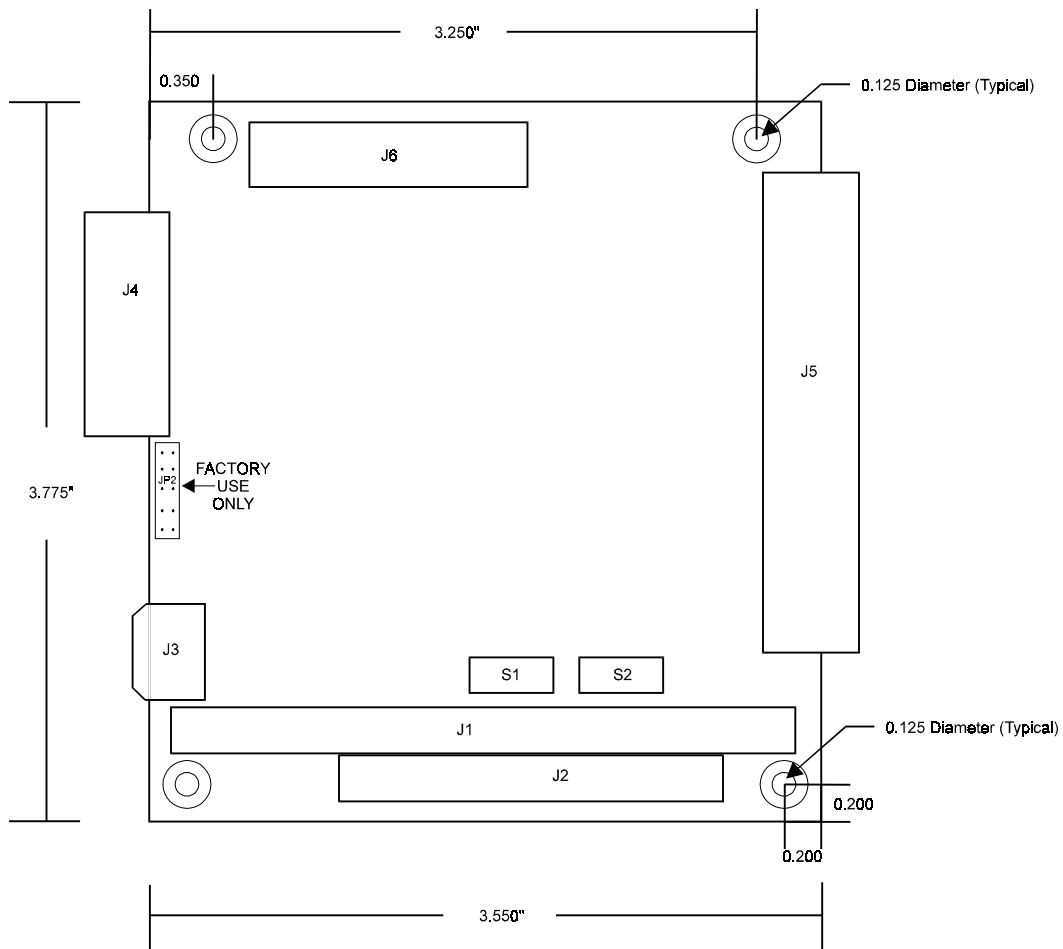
PC68 DIMENSIONAL LAYOUT
